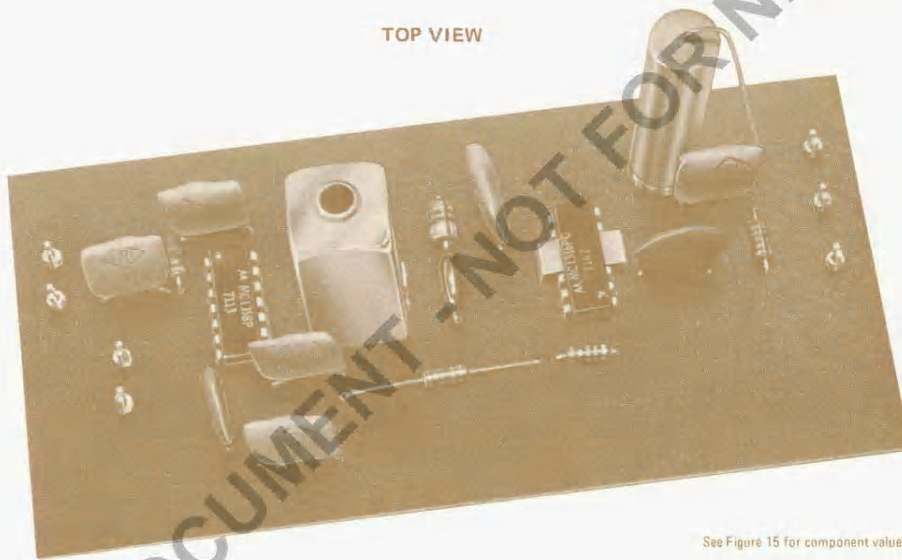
MC1358/MC1316 PRINTED CIRCUIT BOARD
